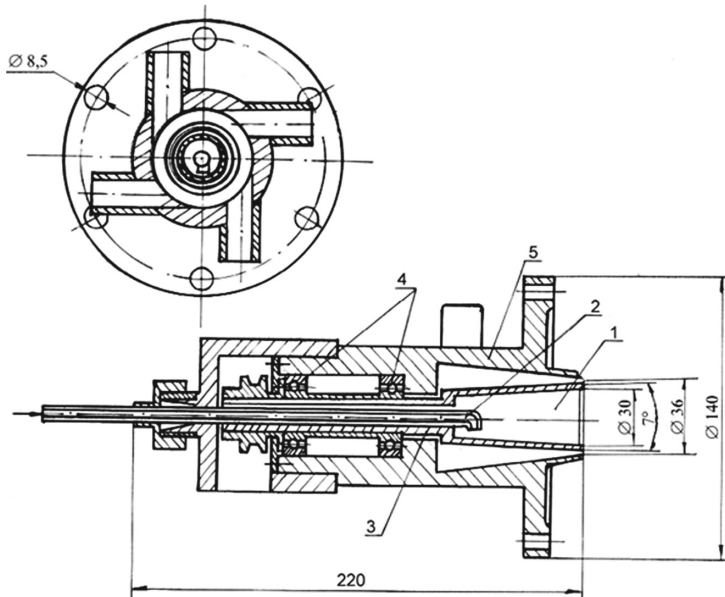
Drawing of a rotary cup atomizer: 1 – spray cone; 2 – fixed tube; 3 – hollow shaft; 4 – bearings; 5 – cone.
